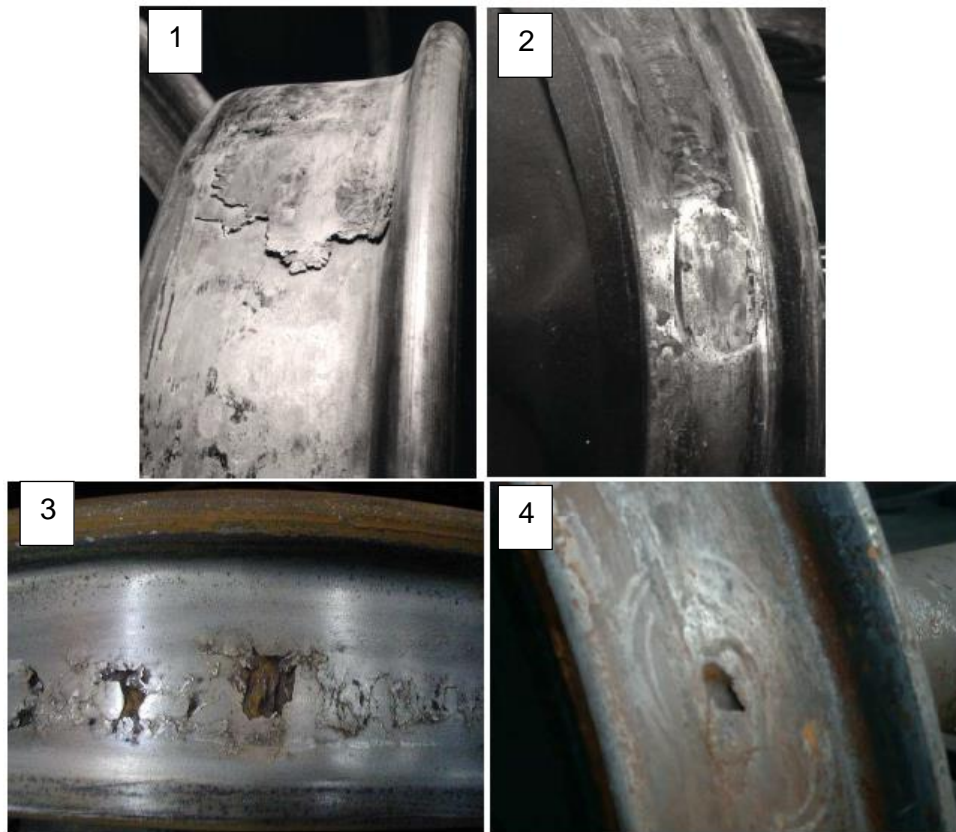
Wheel Defects: (1) Metal build-up (2) Wheel flat (3) Shelling (4) Cavities [8].
